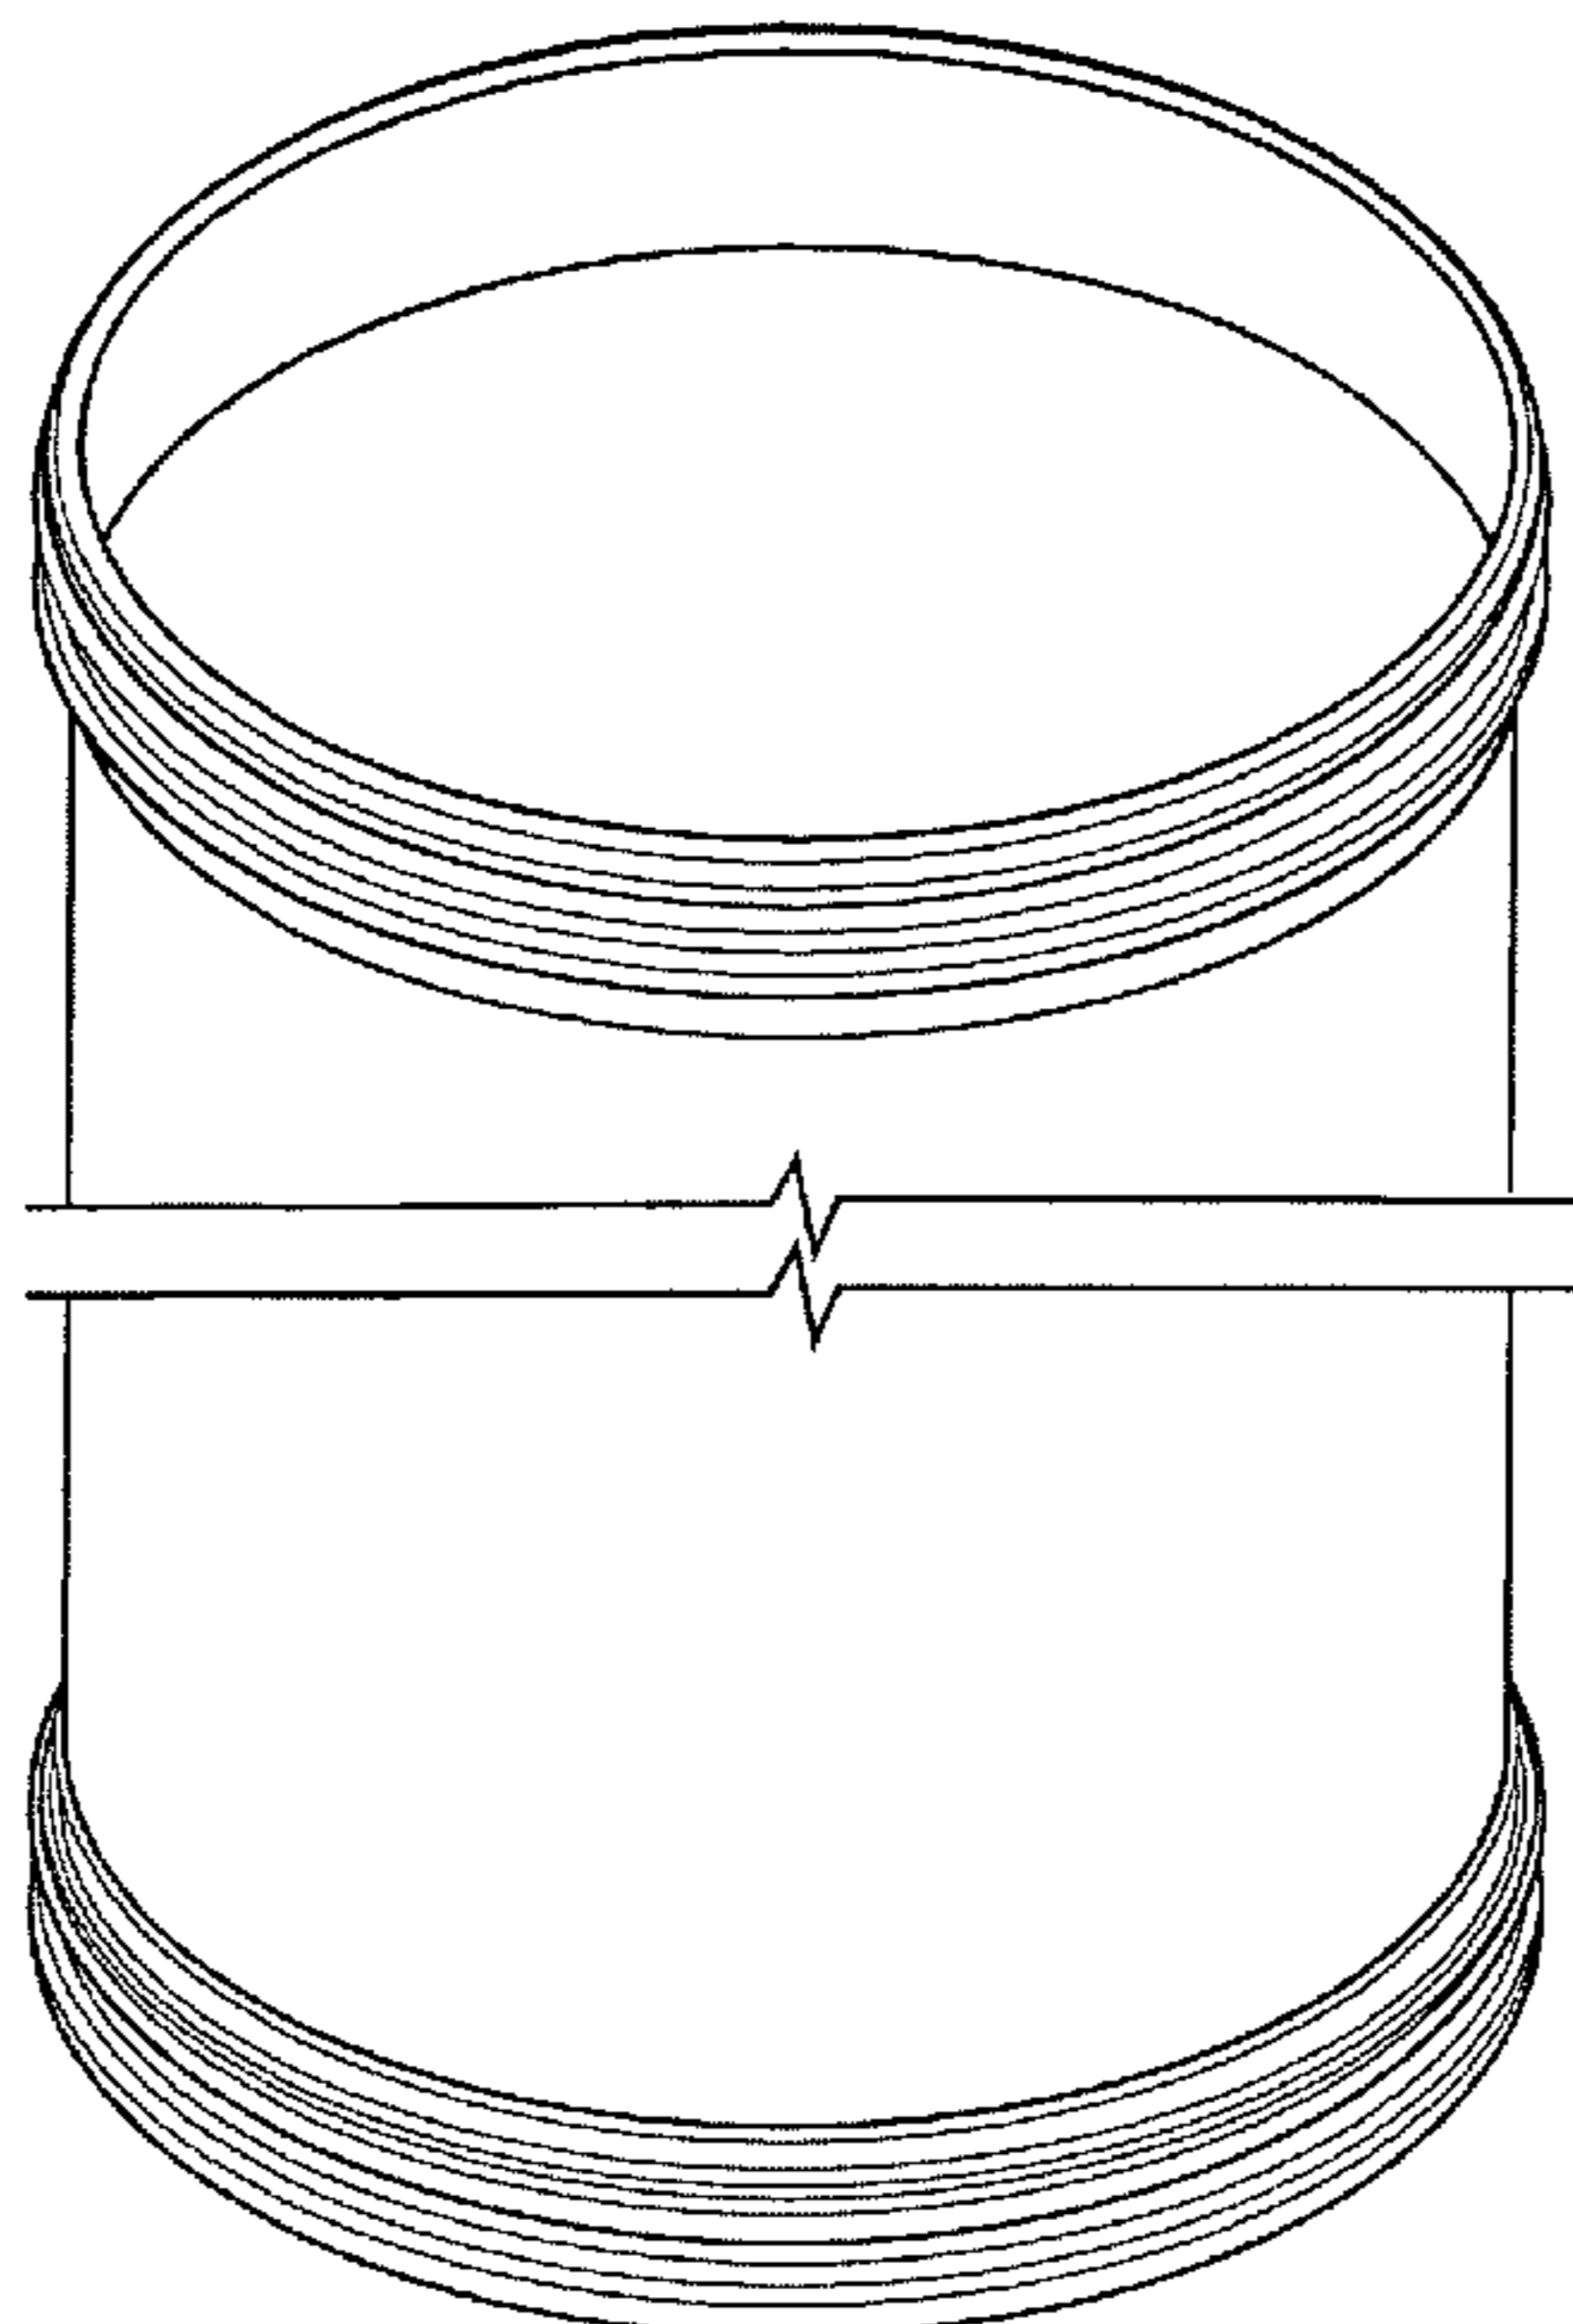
is a side elevational view of the flexible tubular connector of FIG. 1; and,
